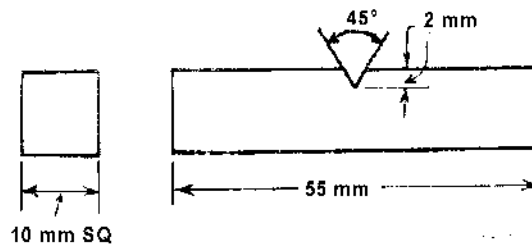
Principal dimensions of a Charpy Impact test specimen
